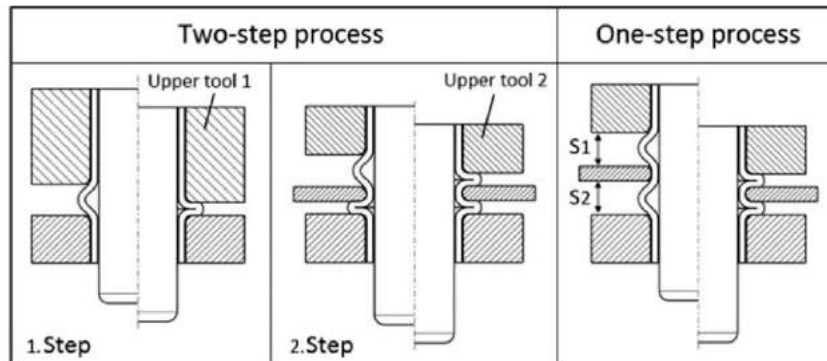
Mechanical interlocking techniques by tube expansion.
